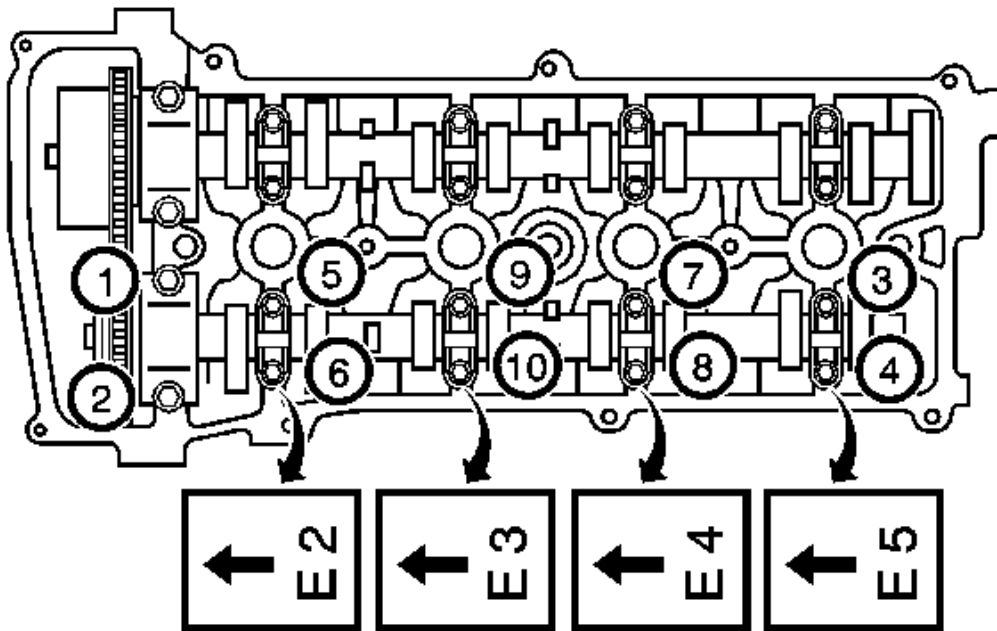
Identifying Exhaust Camshaft & Valve Lifters
